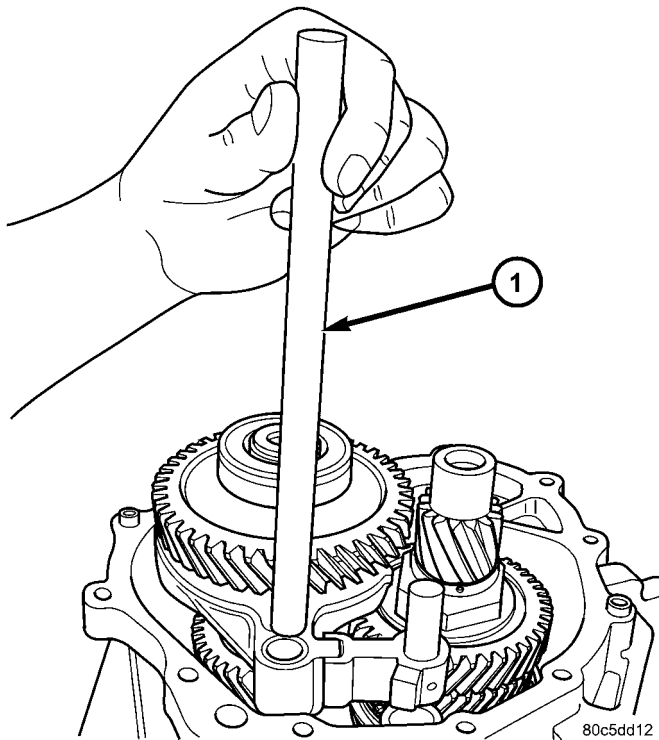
1/2-5/R Shift Rail Removal/Installation
